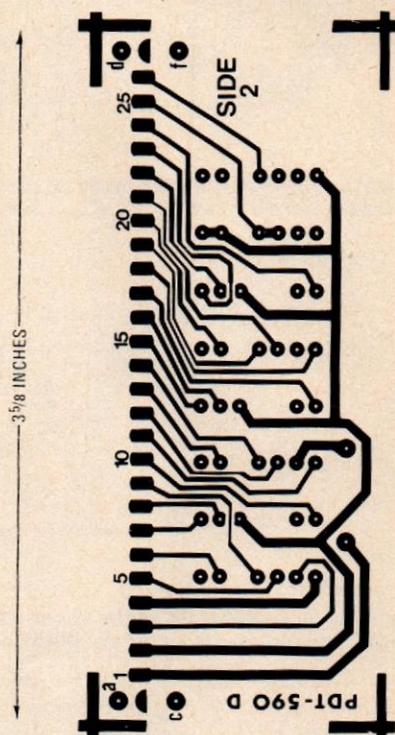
DISPLAY BOARD uses this pattern with edge pads to mate with those on main board.
